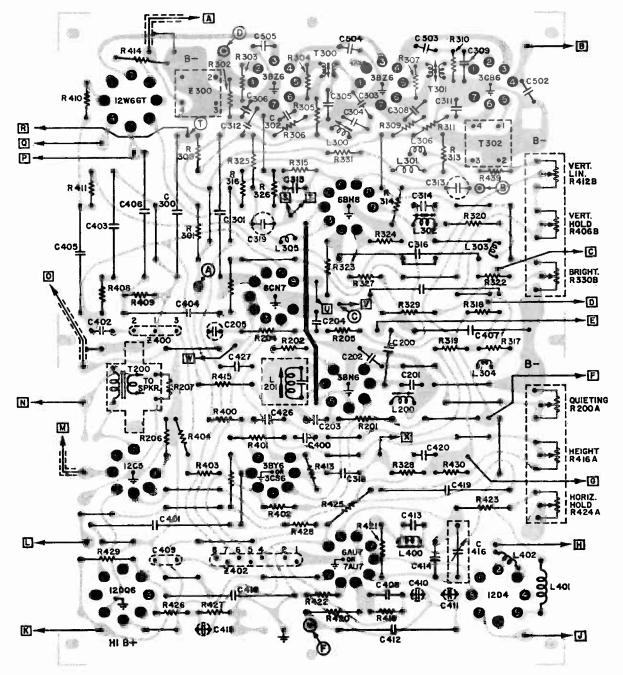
Bottom View of Printed Board Showing Top Components Symbolically
